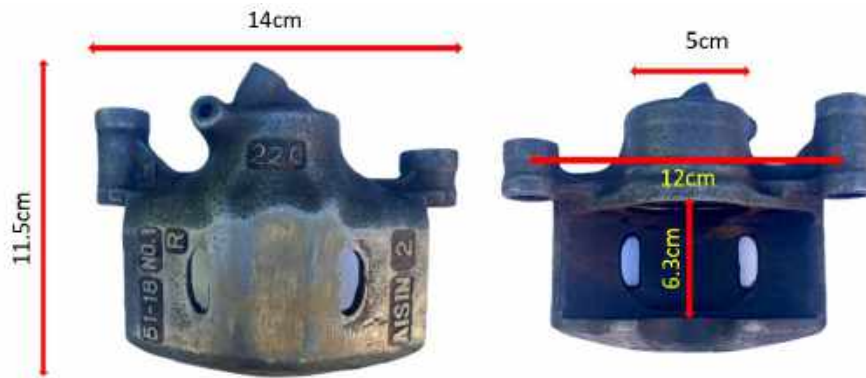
Brake caliper dimension of Mitsubishi Galant.
